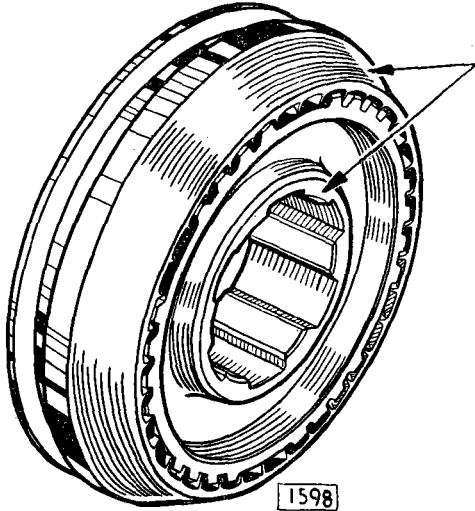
The wide chamfer end of the operating sleeve must be fitted to the same side as the large boss of the inner synchro sleeve.
